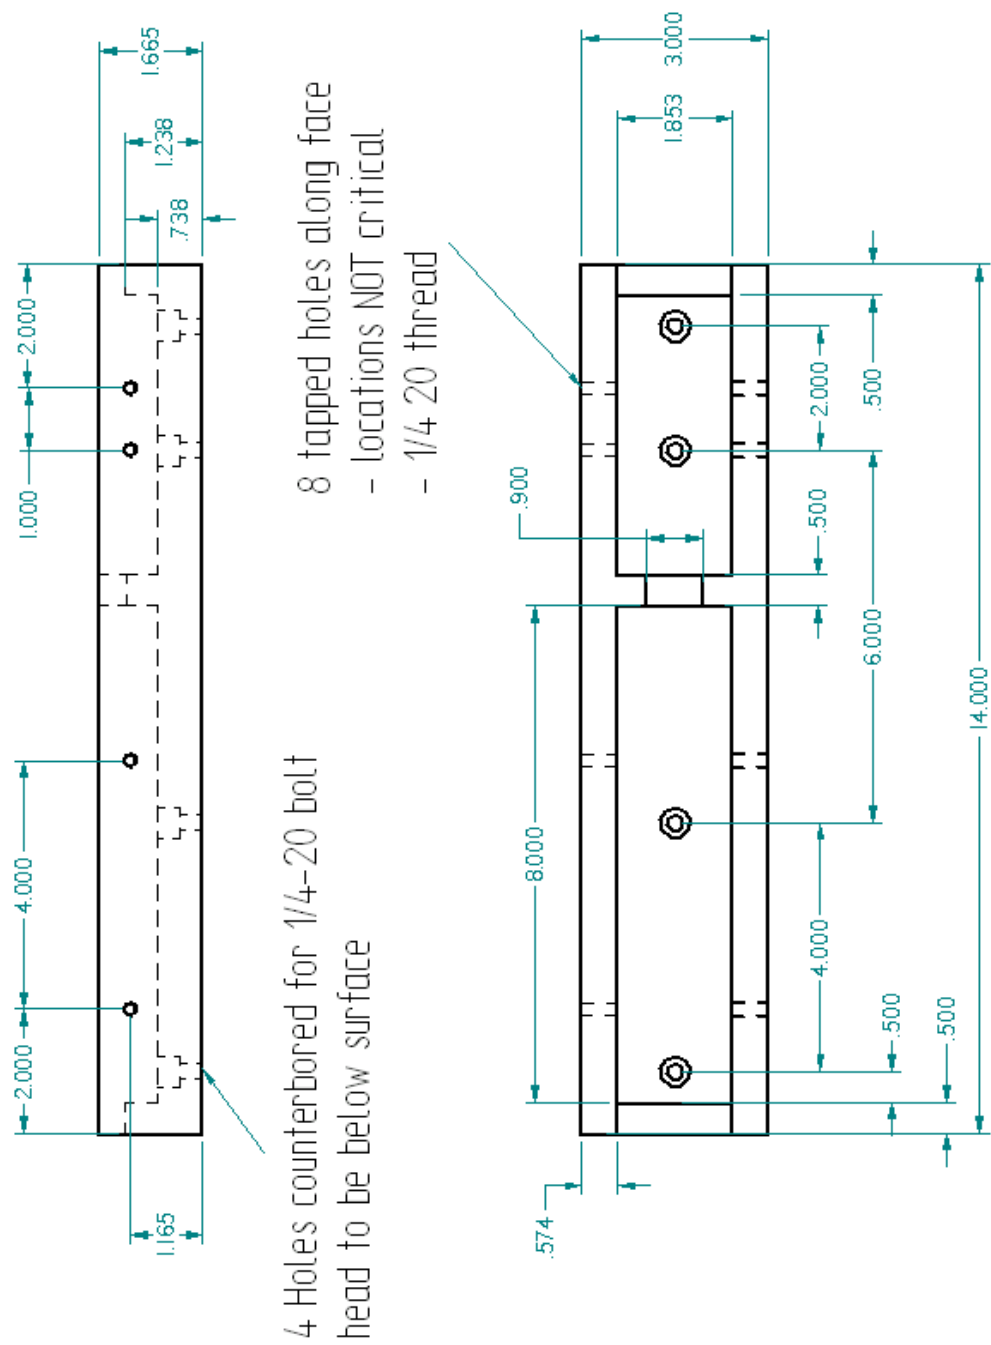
Alignment block (aluminum). Used to rigidly hold Terfenol-D transducer and fluid chamber at a fixed spacing and inline.
